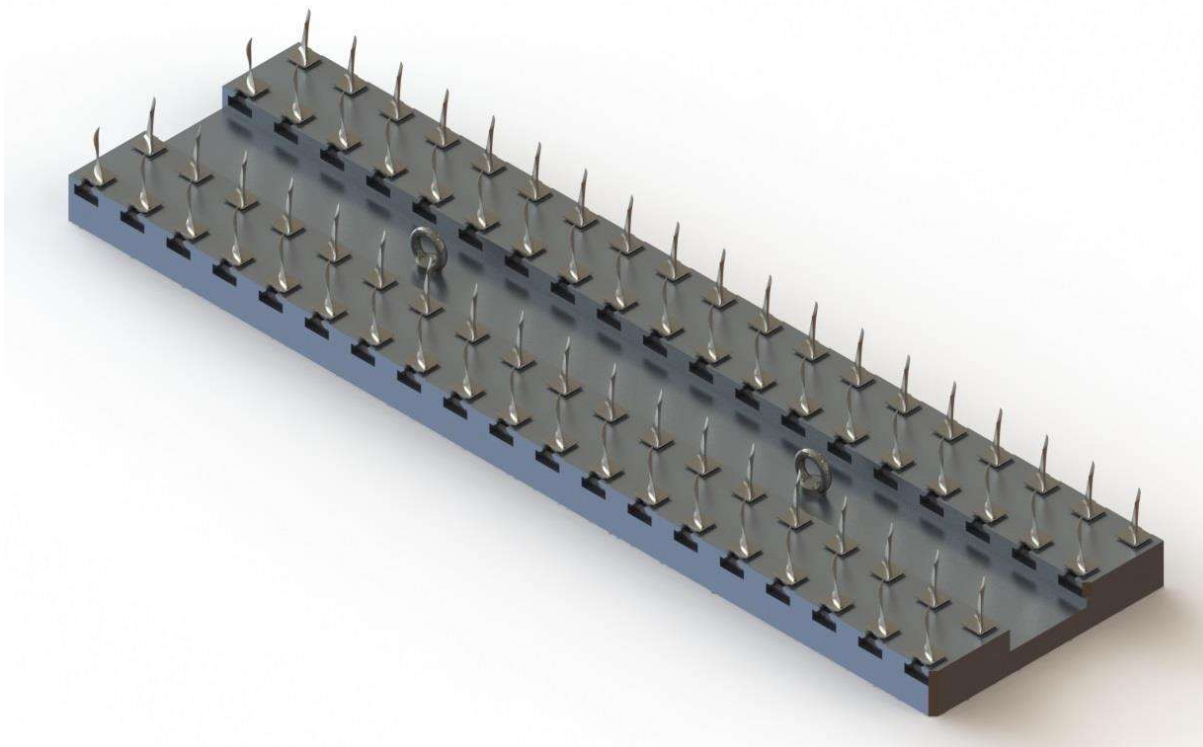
Rendered Image of Fixture Tool with Blades Assembled
